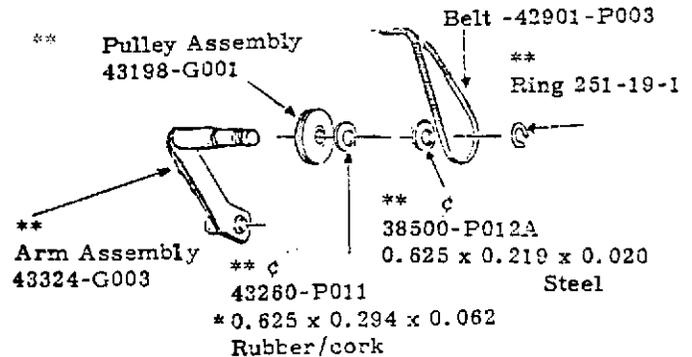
REPLACING FLYWHEEL DRIVE PARTS
